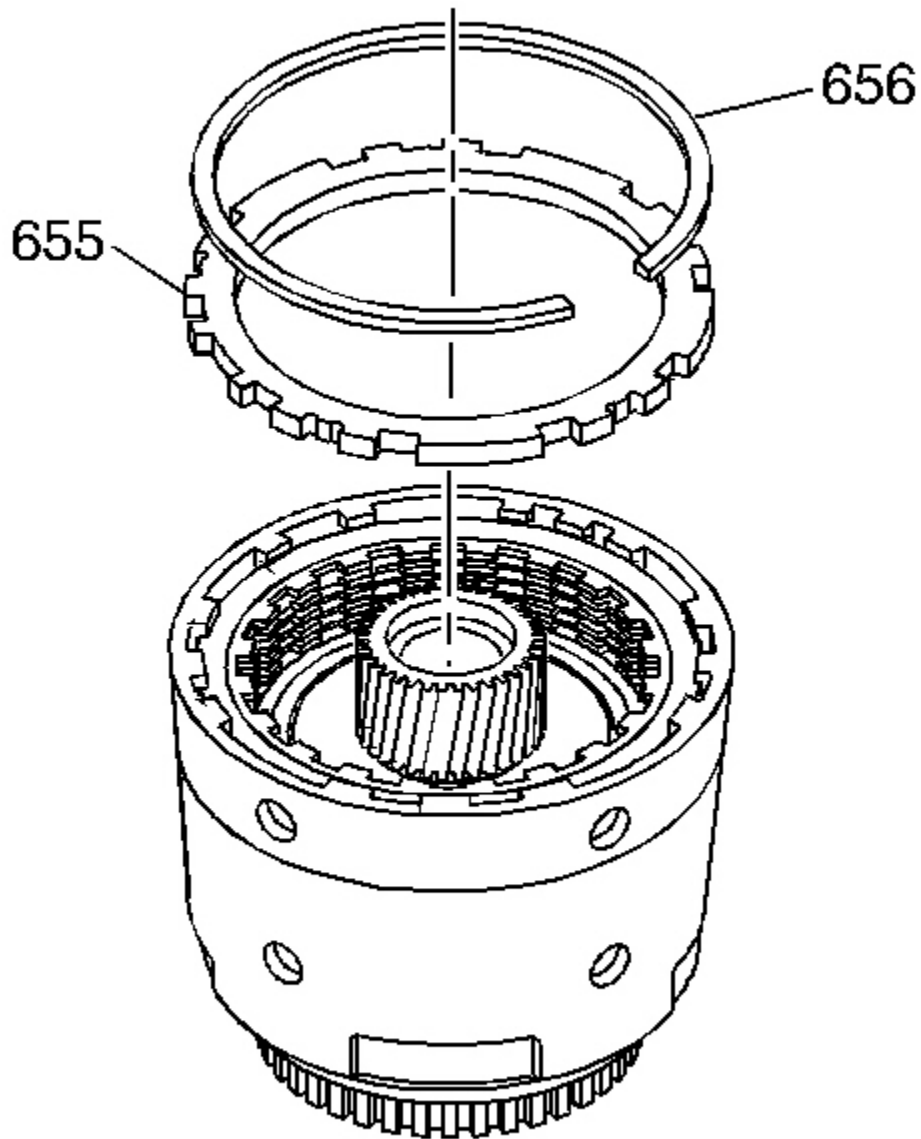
Locating 3rd & 4th Clutch Selective Backing Plate & Retainer Ring
